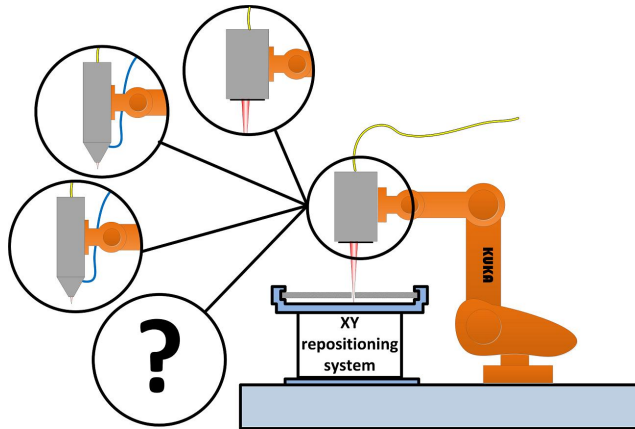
A laser processing setup composed of two repositioning systems and a set of interchangeable cutting heads.
